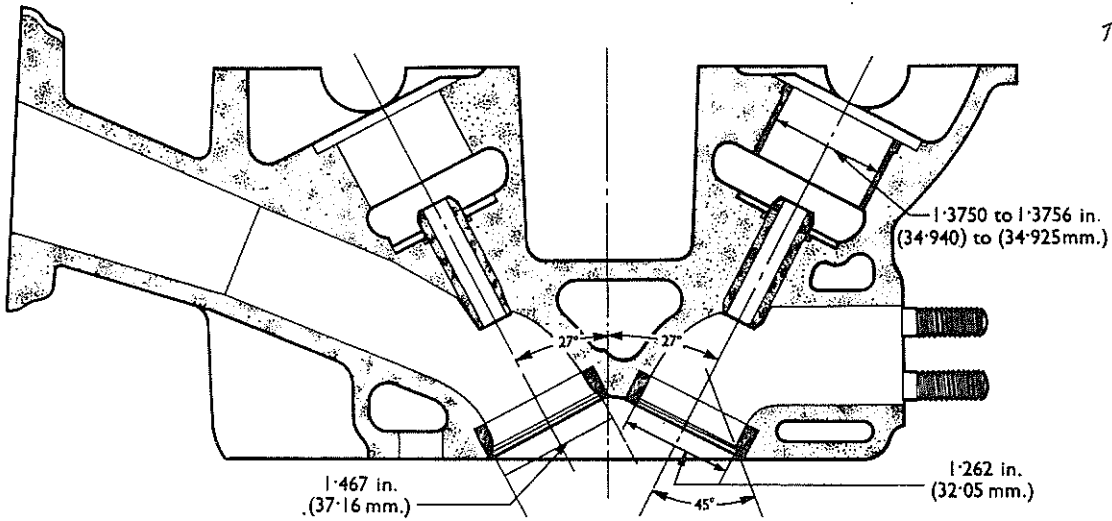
VALVE SEAT INSERTS, VALVE GUIDES & VALVE FOLLOWER SLEEVE
